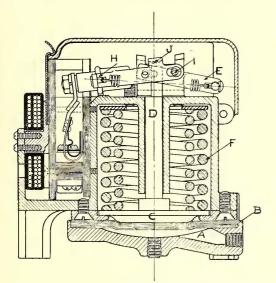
SECTION SHOWING CONSTRUCTION OF MOTOR REGULATOR
